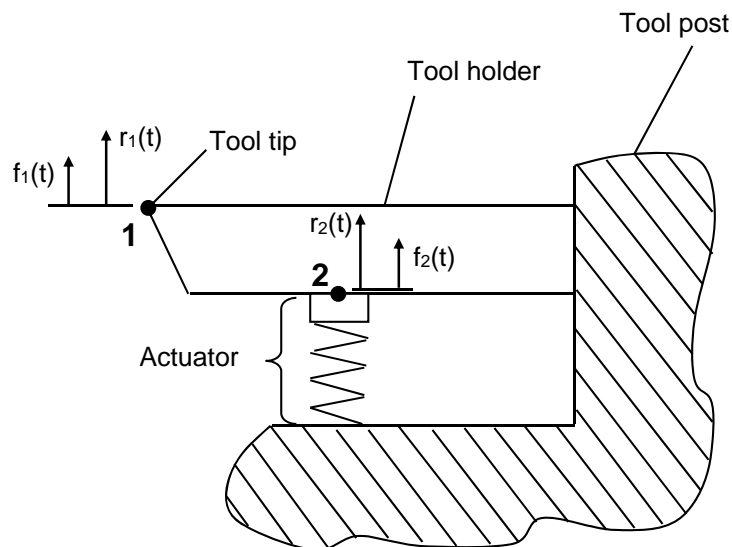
Tool holder and actuator with cutting and actuator forces.
